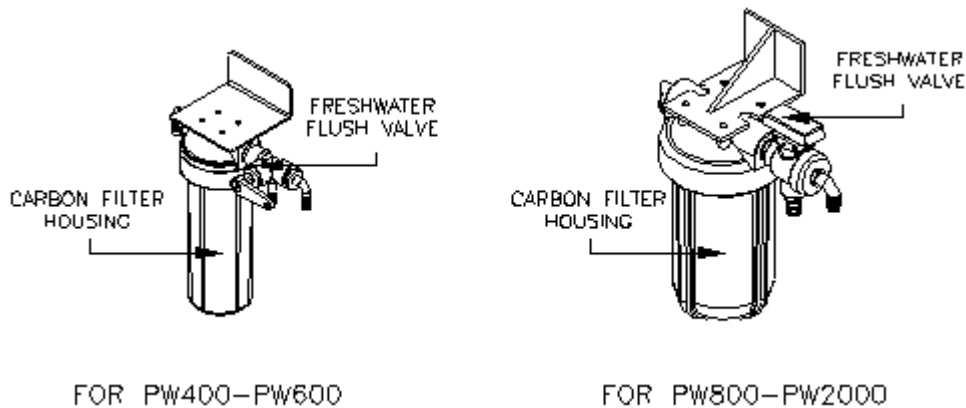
Carbon Filters with Freshwater Flush Valves – Isometric Views.
